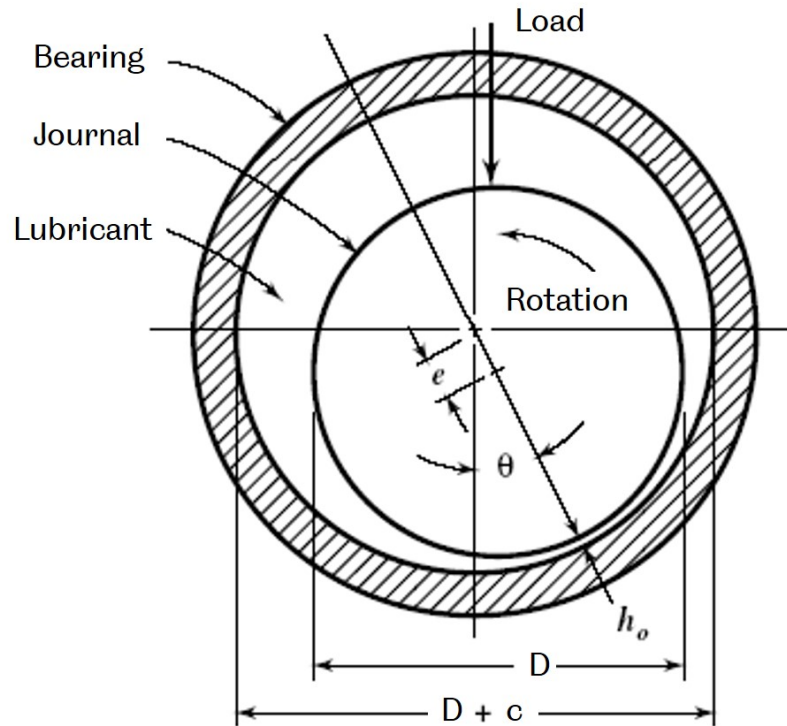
Cross-section of a journal bearing with exaggerated clearance for clarity
